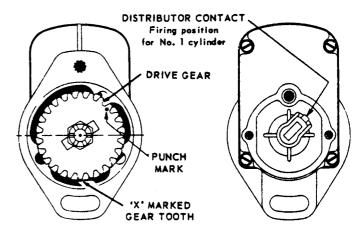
, DRIVE GEAR TIMING MARK ASSEMBLY
